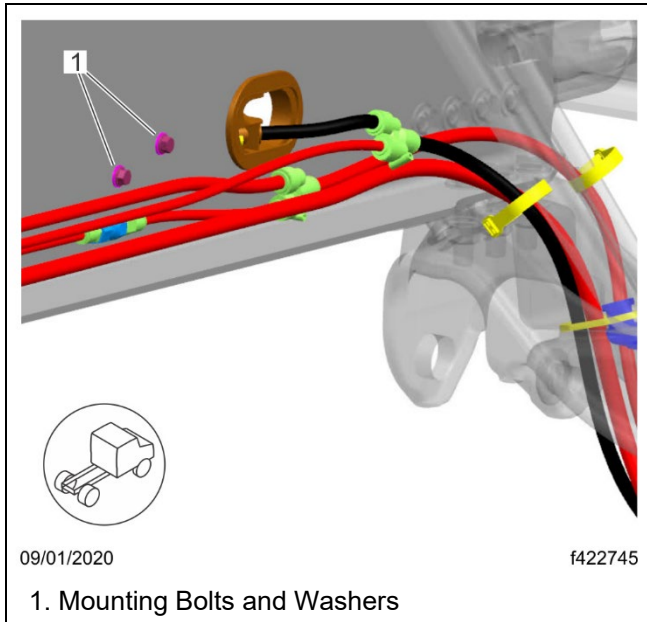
, Modulator Valve Fasteners, Inside Frame Rail View
